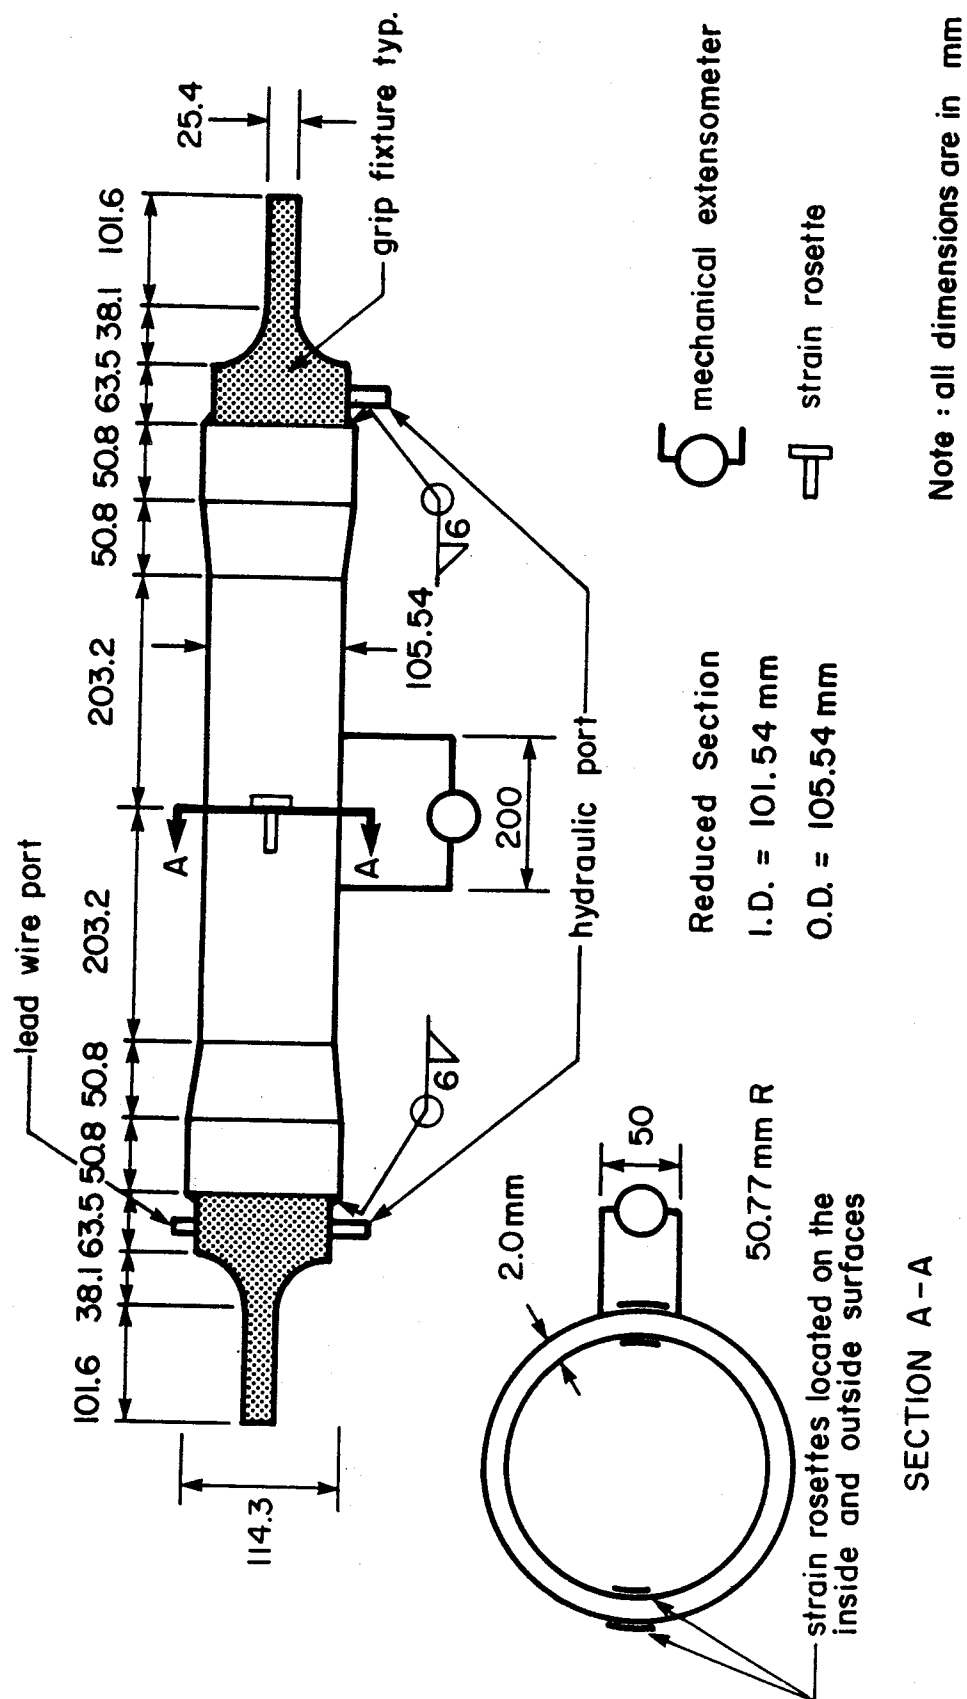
PLANE STRAIN TENSION SPECIMEN
